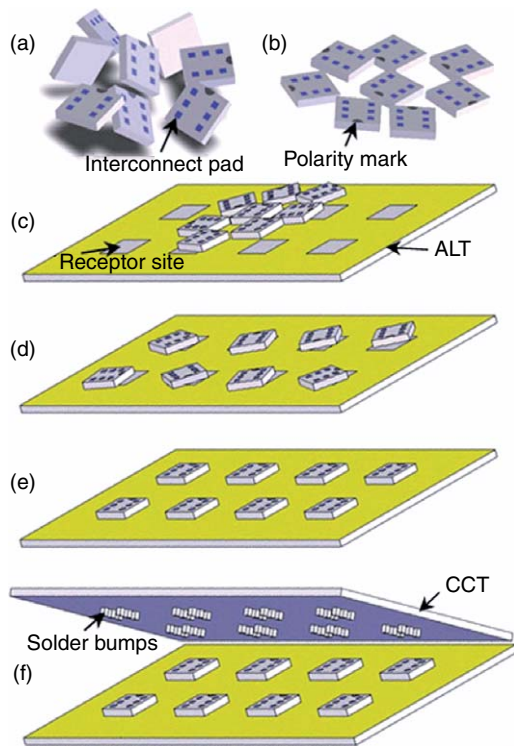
Batch assembly strategy: (a) randomly oriented bulk parts; (b) bulk parts are uniquely face-oriented and spread in a single layer; (c) parts are palletized on an alignment template; (d) parts are distributed one-to-one to receptor sites; (e) parts are aligned to the receptor sites with unique in-plane orientations; and (f) parts are bonded to a chip carrier template (CCT) via wafer-level flip chip bonding. (Source: Fang J, Böhringer K F 2006 Wafer-level packaging based on uniquely orienting self-assembly (the DUO-SPASS processes). *ASME/IEEE J. Microelectromech. Syst.* 15, 531–40.)
